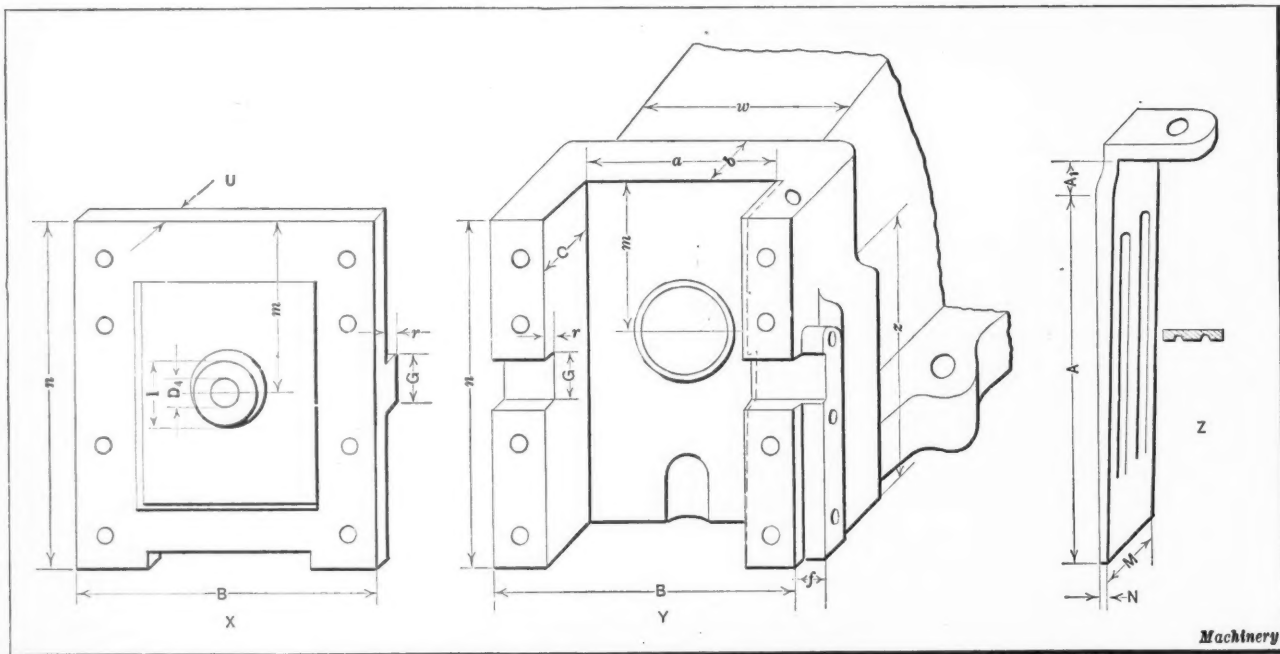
Details of the Slide Plate, Head End of Machine Frame, and Slide Gib
